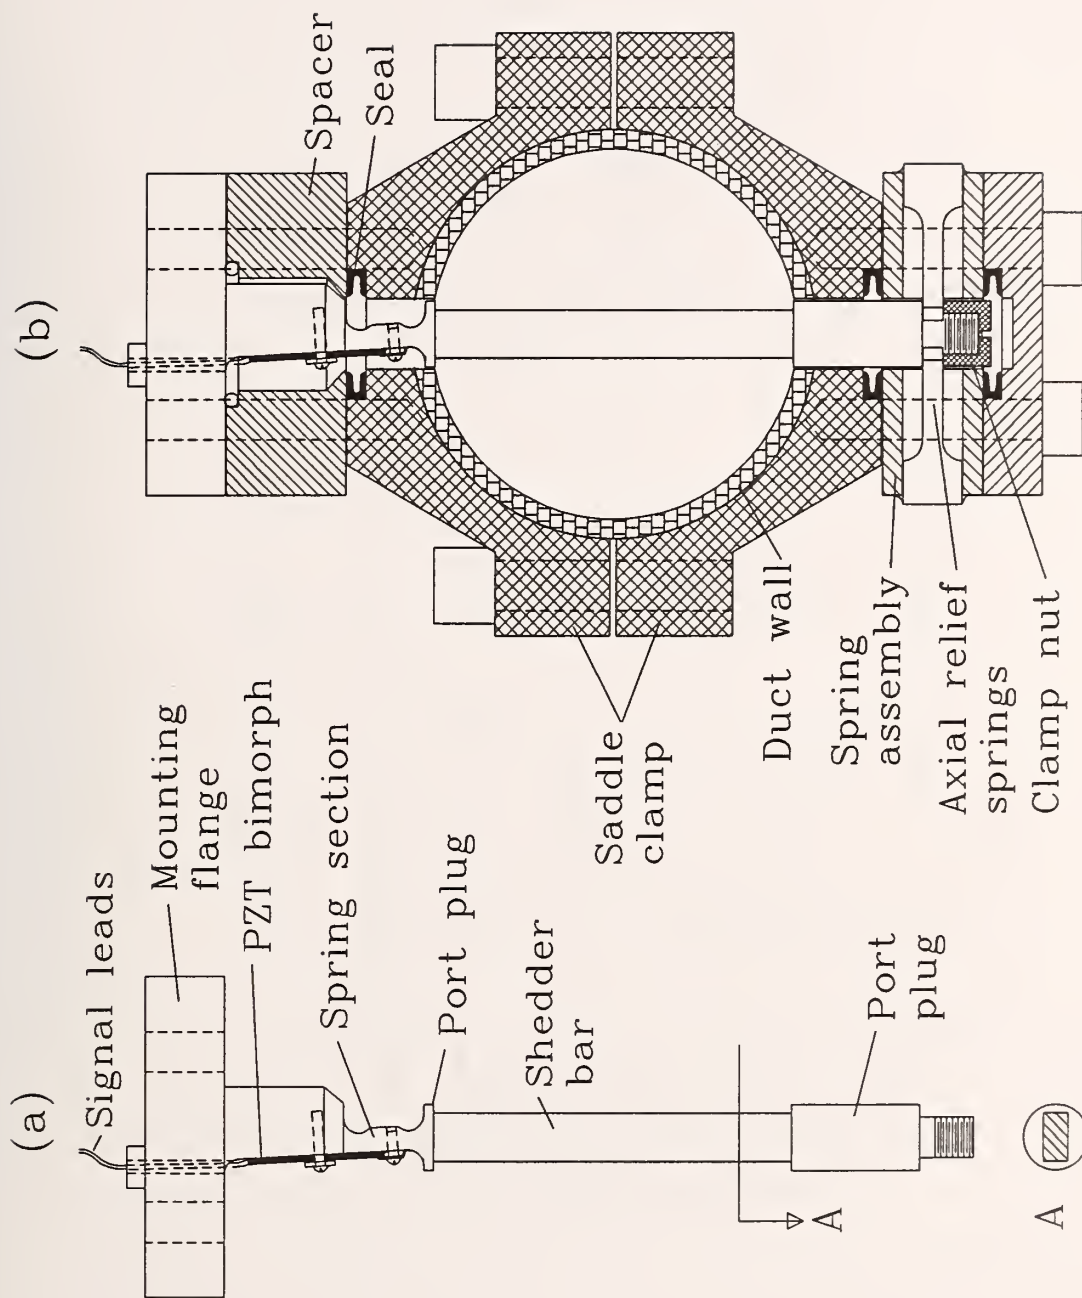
a. Scale drawing of the 88-7-2 flowmeter assembly.
